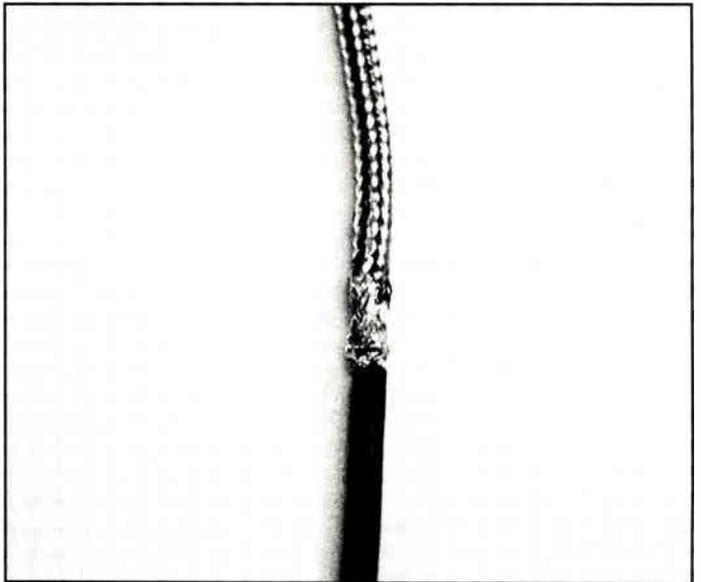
Trim the other end of the RG-8 shield to line up with the RG-59's exposed shield. After tinning the RG-59's shield, solder the RG-8 shield to it.
